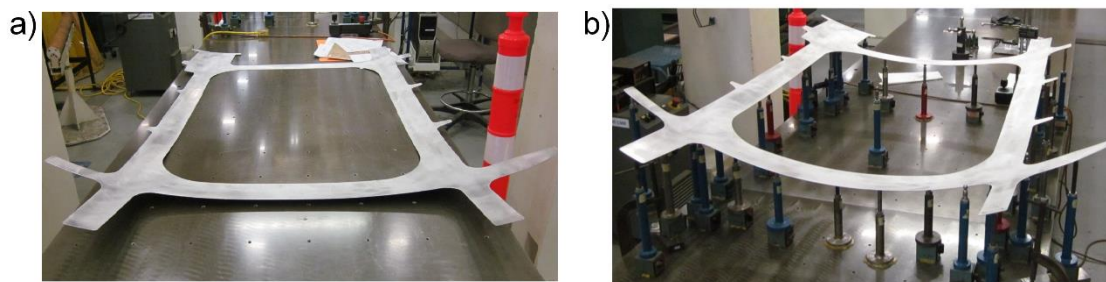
A regular aerospace panel, a) in free-state, b) constrained by fixing jigs on the inspection fixture [2]
